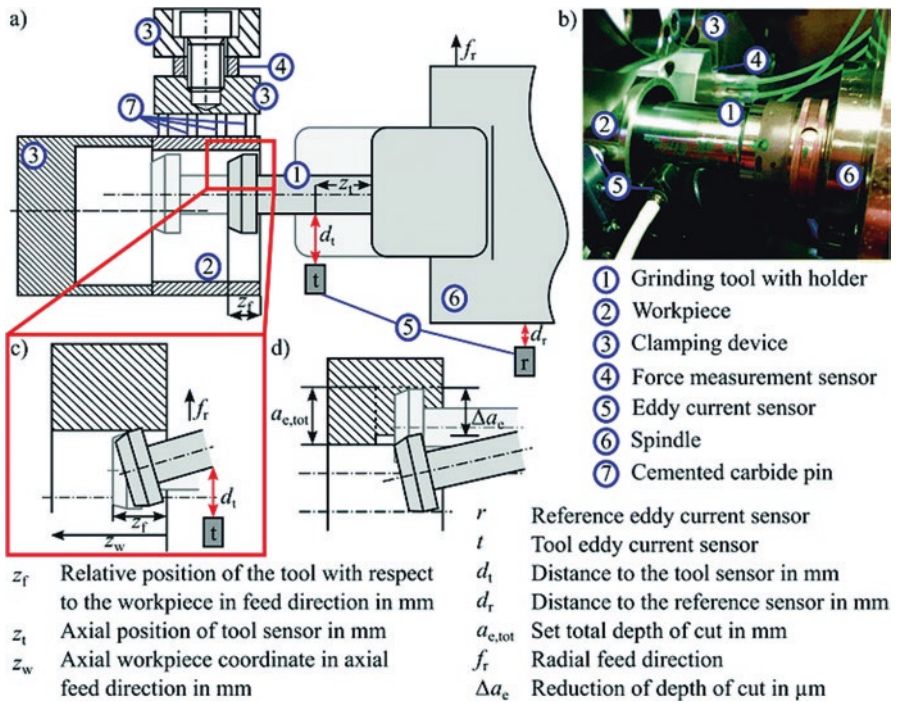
Experimental setup for compliance tests. a) Schematic representation; b) Photograph: Tool sensor at $z_t = 40$ mm; c) Displacement of the tool system due to movement in radial direction in static compliance tests; d) Machining system deflections reduce the total radial stock removal $a_{e,tot}$ by Δa_e in ITG.
